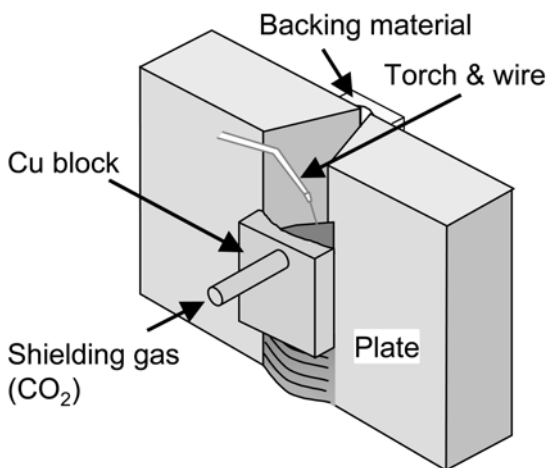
Schematic illustration of electro gas arc welding (EGW).
